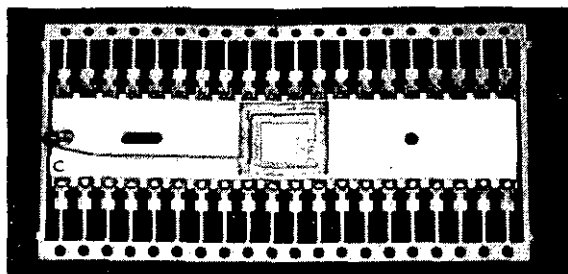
Example of metals soldered to a metallized ceramic part (courtesy Coors Porcelain Co.).
